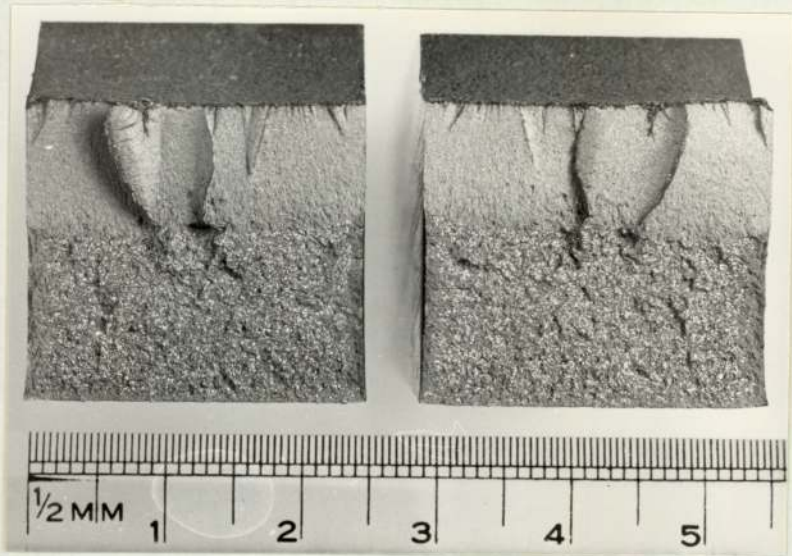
Material L Cast Specimen Fracture Surface.
